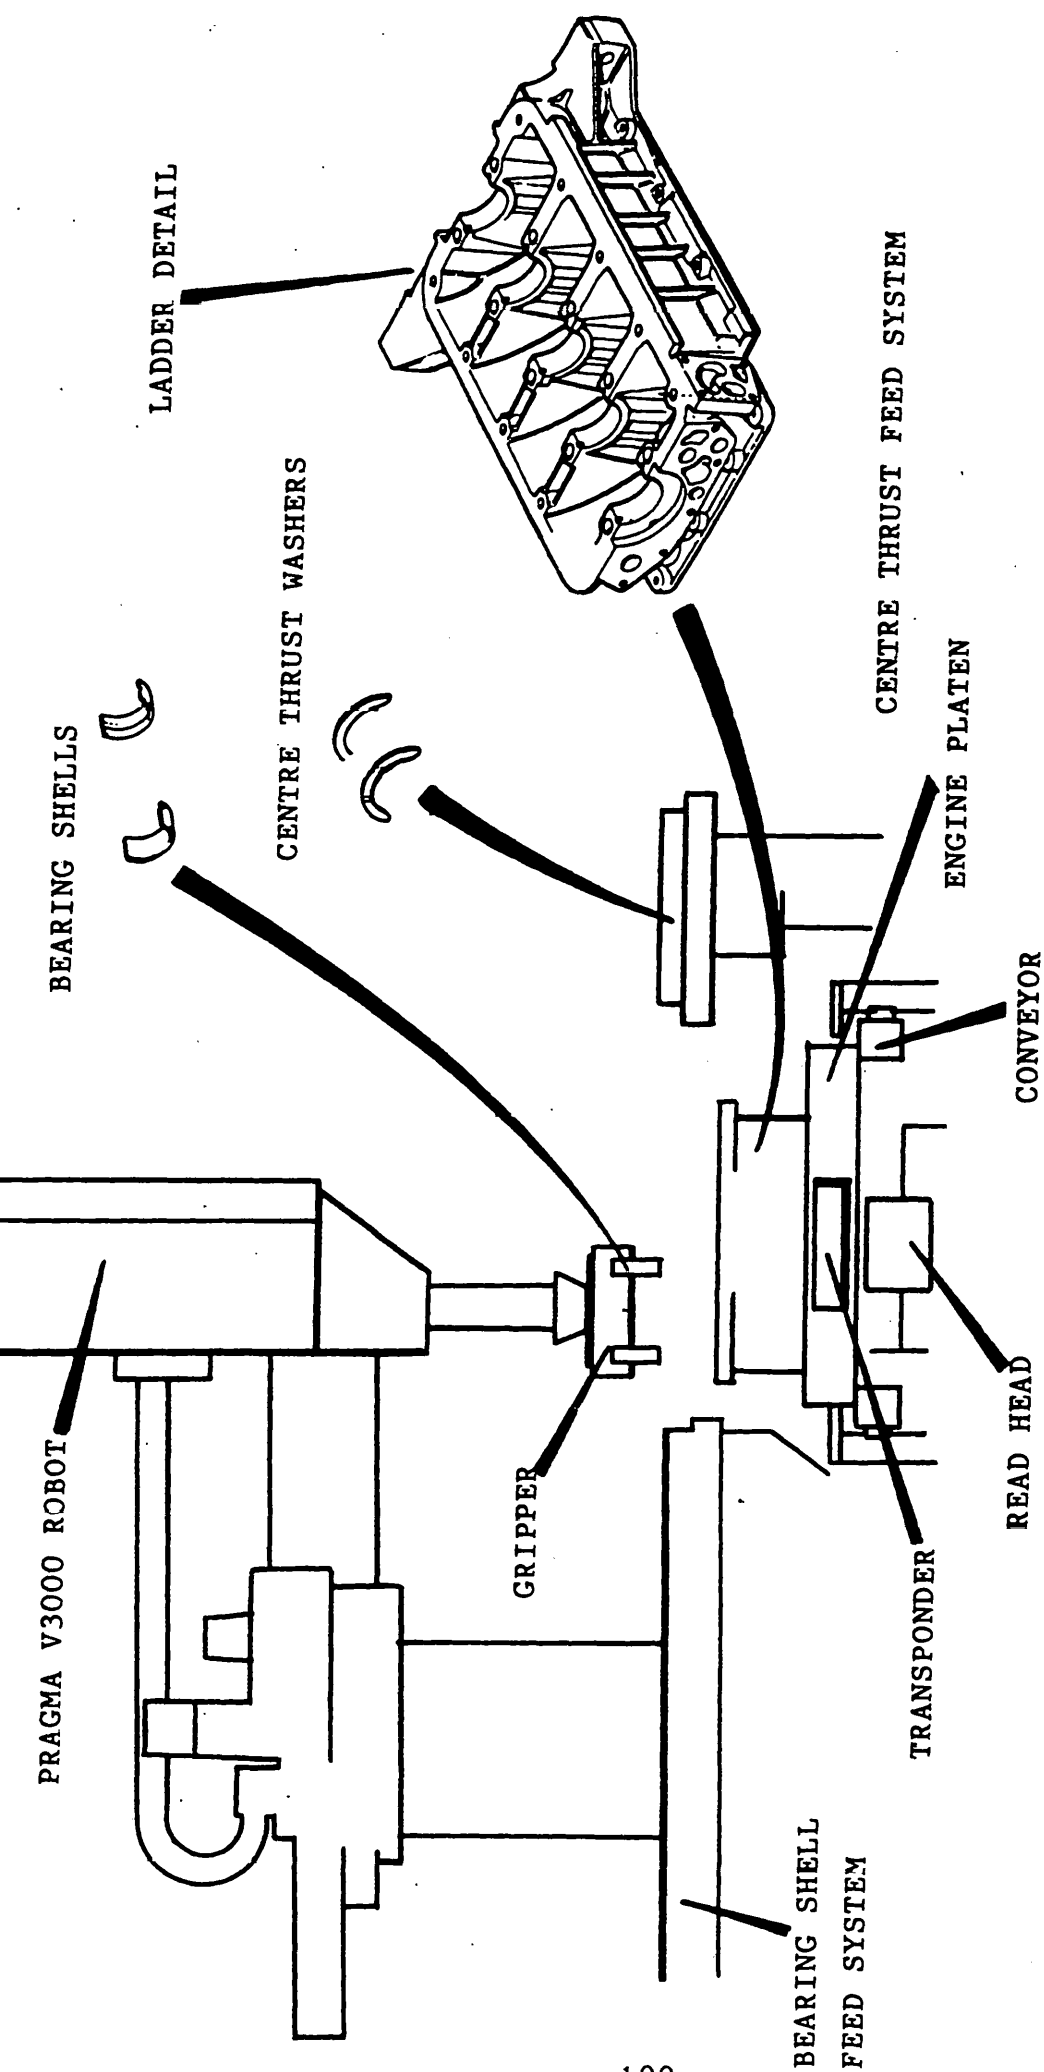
OVERVIEW OF THE BEARING SHELL ASSEMBLY LOAD STATION
